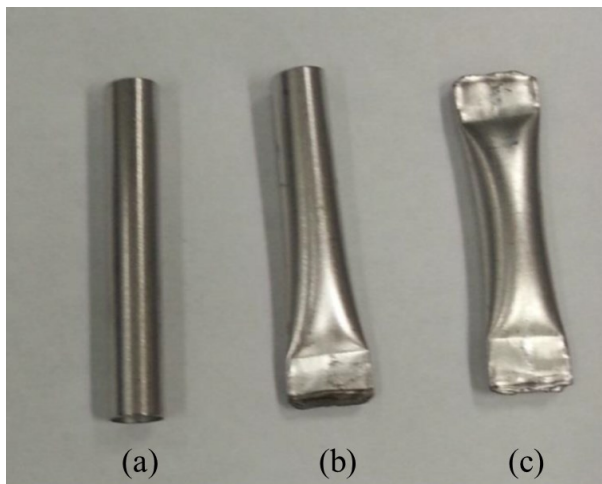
ARC test tubes at various stages of sample preparation: (a) before welding (b) welding of one end (c) after the sample was added the other end was welded closed.
